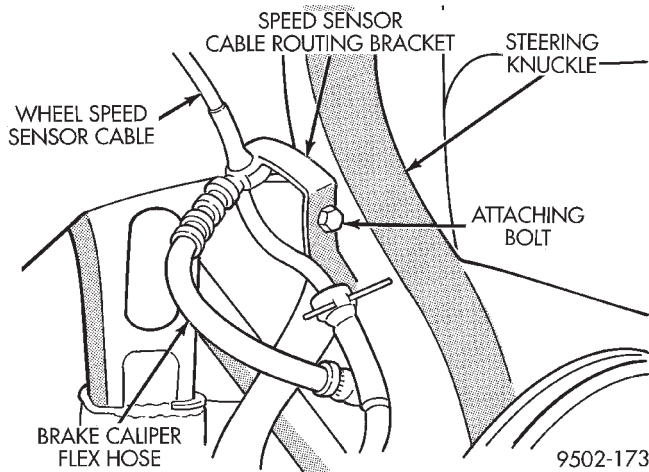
Wheel Speed Sensor Cable Routing Bracket
